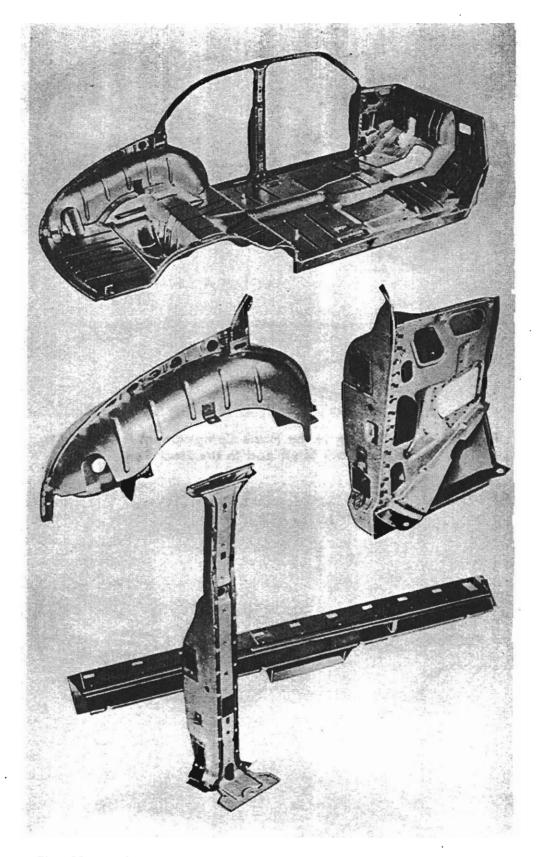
Each Side Consists of a Cowl, Side Panel, Side Sill, Center Pillar, Roof Side Rail, and One Piece Fender and Wheel House.
